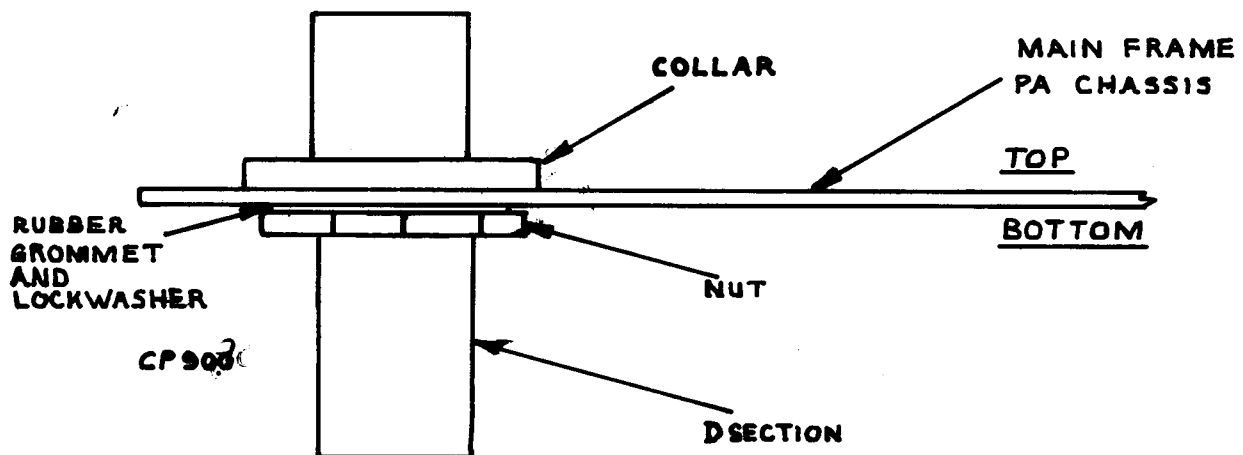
MAIN FRAME PA CHASSIS, SIDE VIEW
